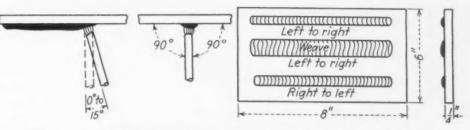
Method of pointing electrode to deposit beads of weld metal on an overhead surface.
